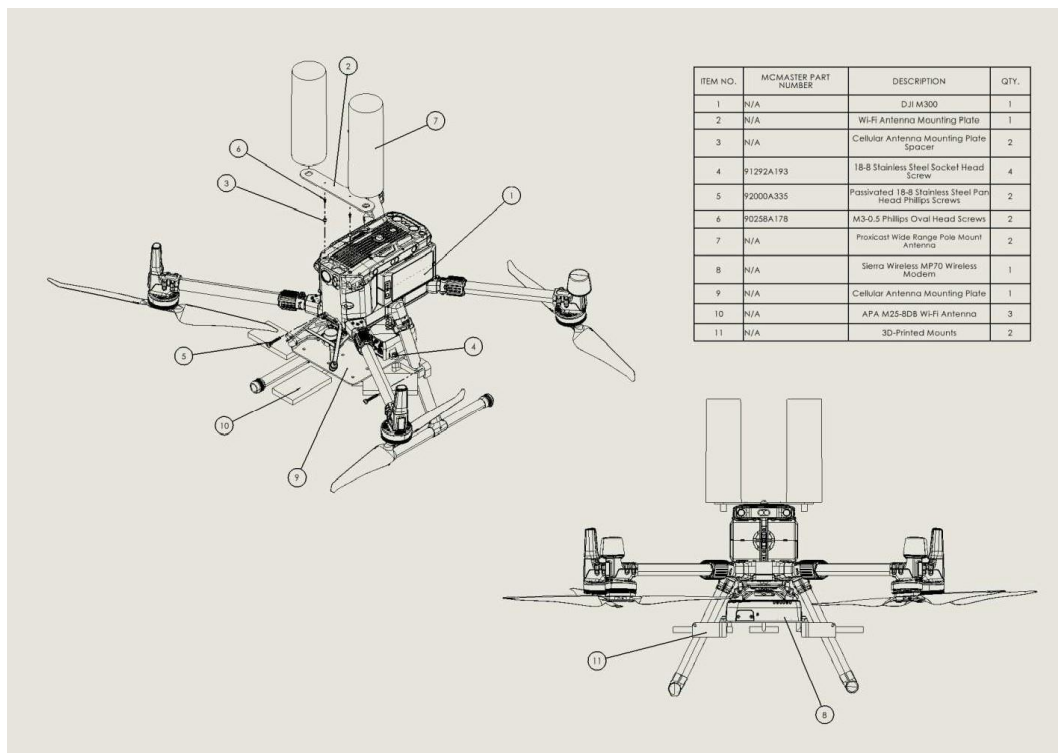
SOLIDWORKS drawing of payload package and bill of materials
